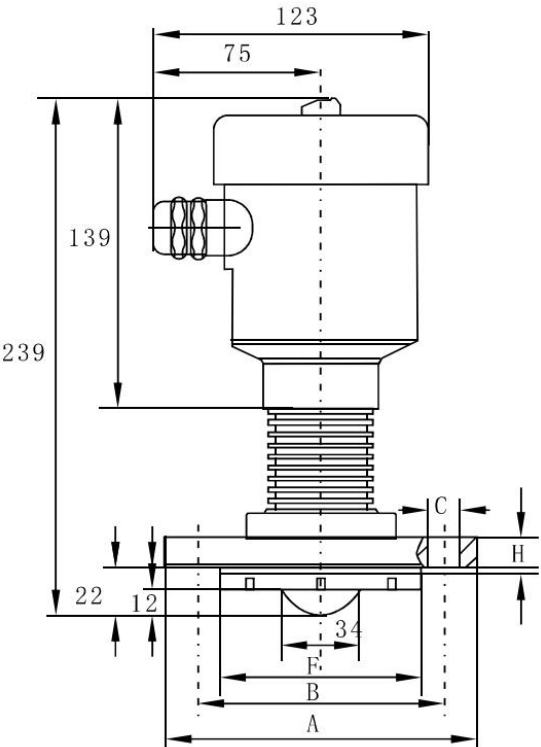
Dimensional Drawing of Corrosion-Resistant Flange Structure, Standard Temperature and Pressure (Unit: mm)
